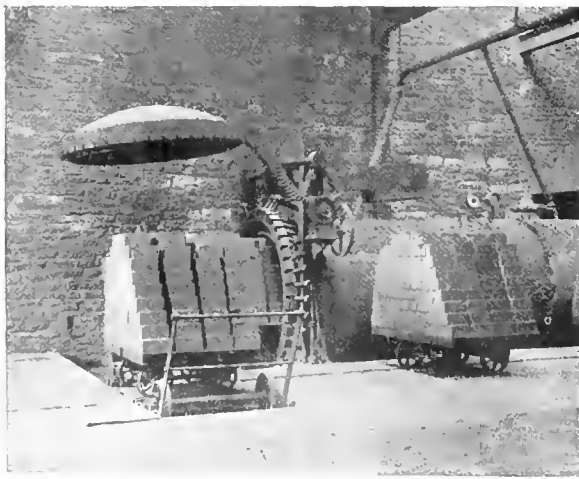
Hardening Chamber End, Showing Door Opening Arrangement.
